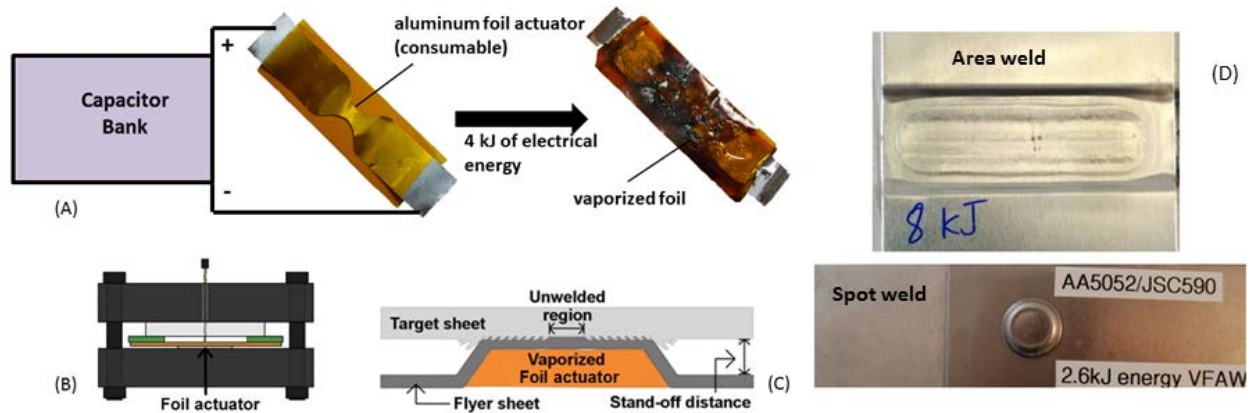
K.1. Schematics of VFAW: (a) foil consumable, before and after being used; (b) typical welding assembly; (c) welding event; and (d) different weld geometries possible with various foil actuator shapes. Source: OSU Impulse Manufacturing Lab.
